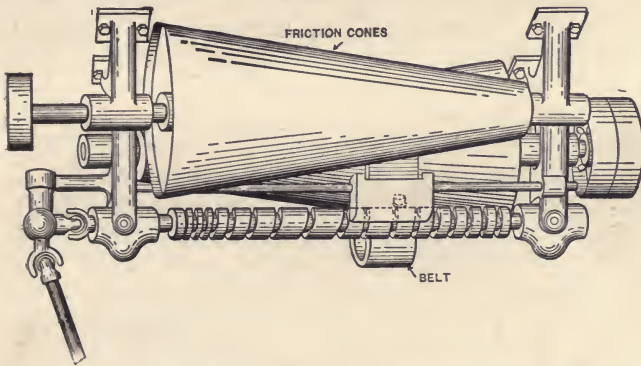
LATHE-SPEED REGULATOR (BROWN & SHARPE).
